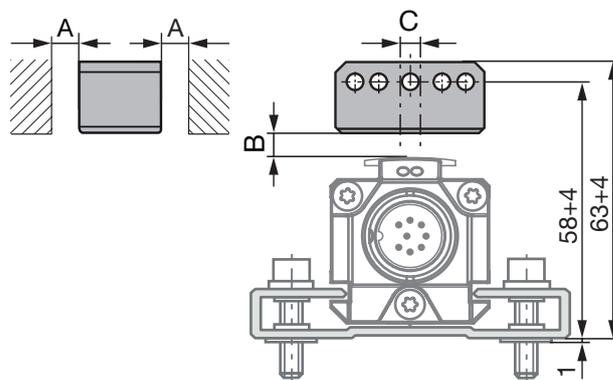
Dimensions and distances with BTL6-A-3801-2 magnet
